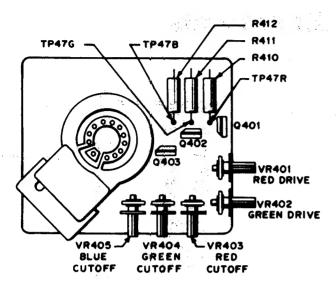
Neck Board—Component Side (With Horizontally Mounted CRT)
